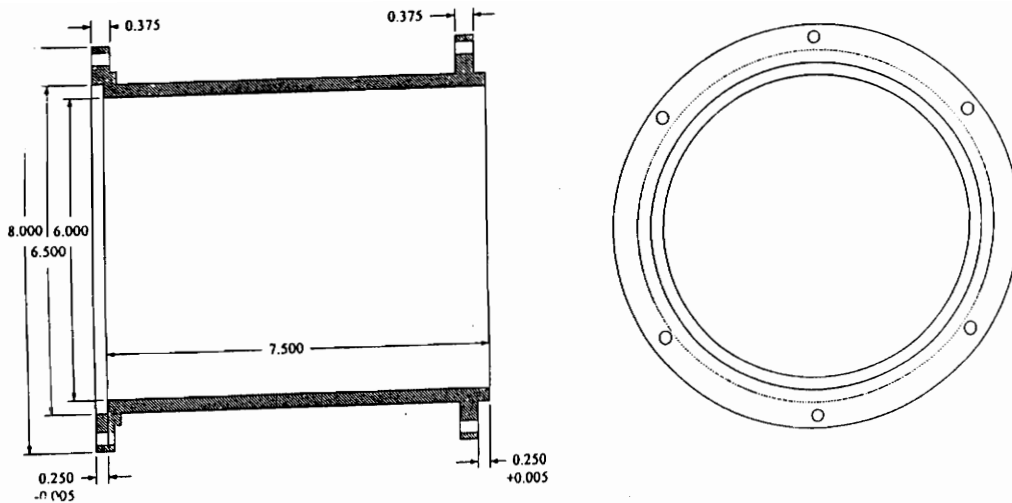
Sectional view of buffer section. (Dimensions in inch)
